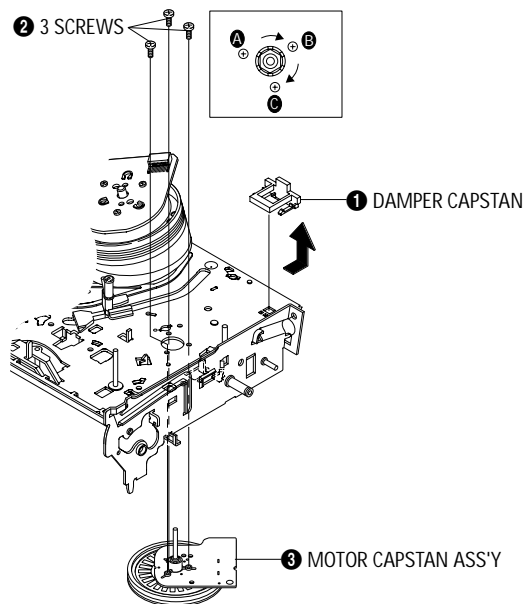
Damper Capstan, Motor Capstan Ass'y Removal
